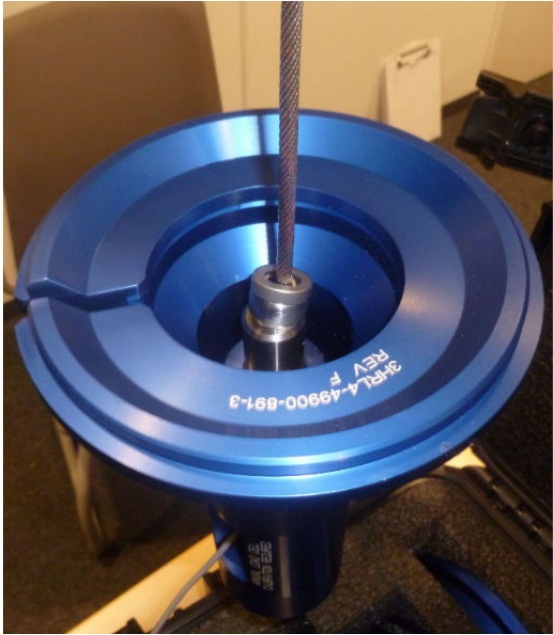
Hook Damper Assembly (44307-480 hook damper series for hoist 44301-10-7 shown)
